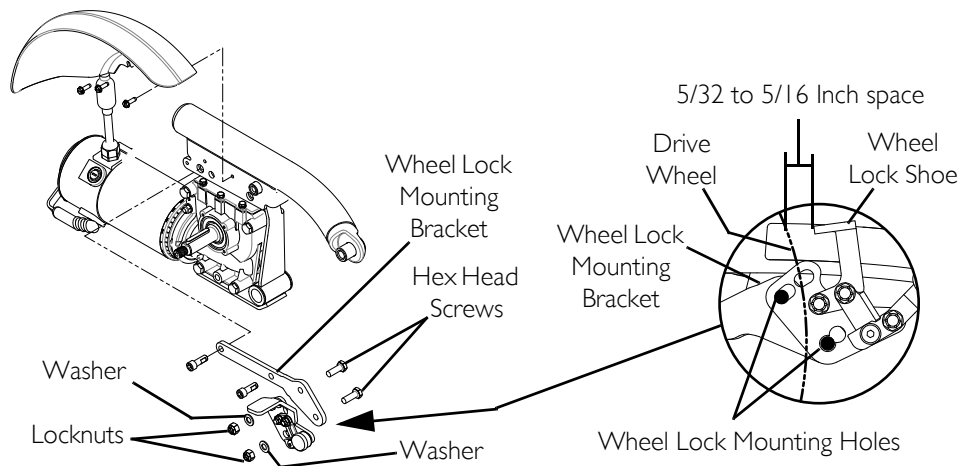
Installing the Wheel Locks - SSD 4-pole Motor
